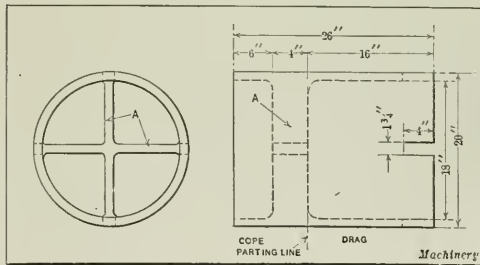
Casting which was produced more economically through a Change in Molding Methods
